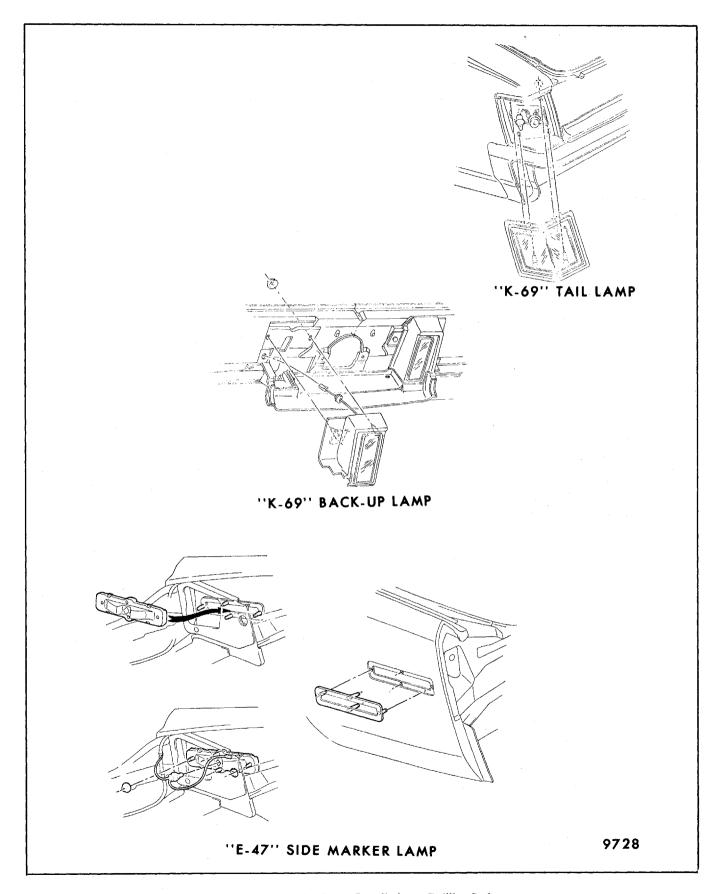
Exterior Lamp Installation - Cadillac Styles
